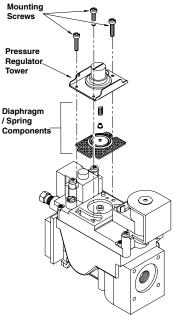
Removing Mounting Screws, Regulator Tower, and Diaphragm/Spring Components
